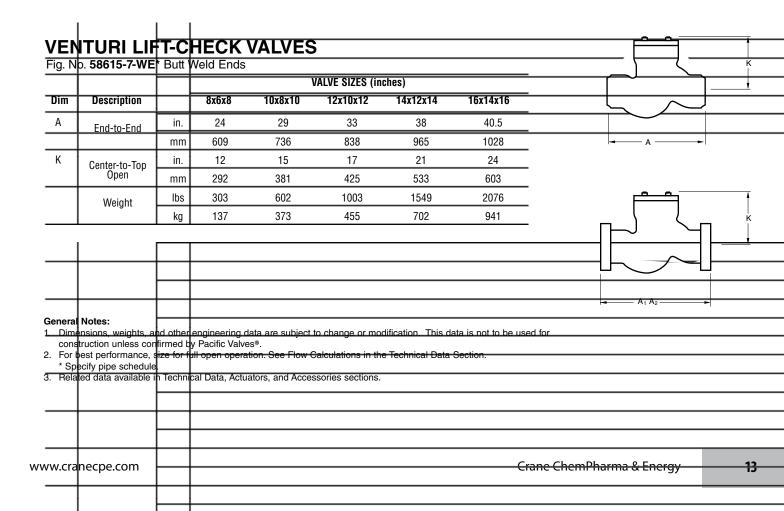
WE* Butt Weld Ends
